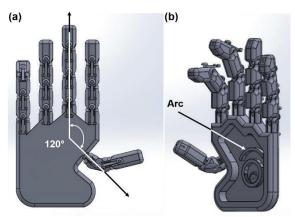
CAD design of (a) top view of the palm, and (b) palm side with proper working mechanism
